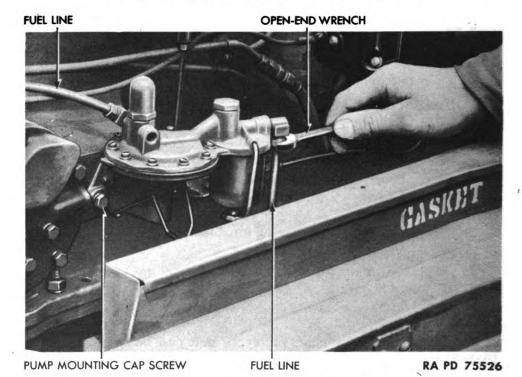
Removing Compressor Unit Engine Fuel Pump
